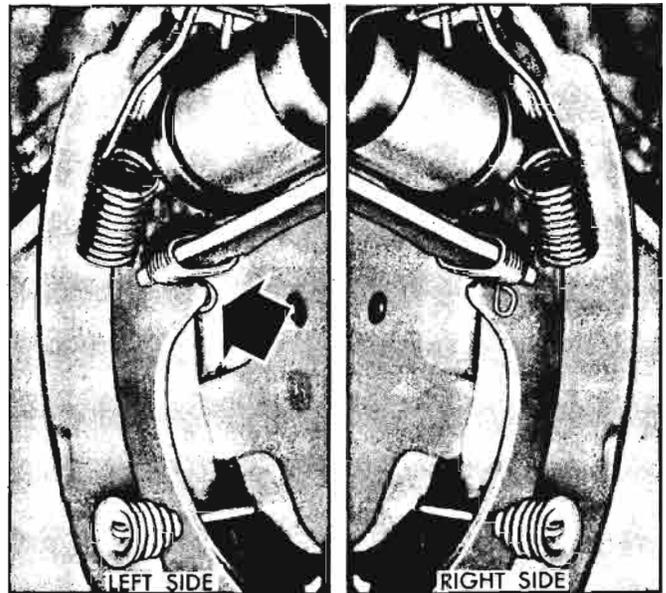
Parking Brake Strut Anti-Rattle Spring
